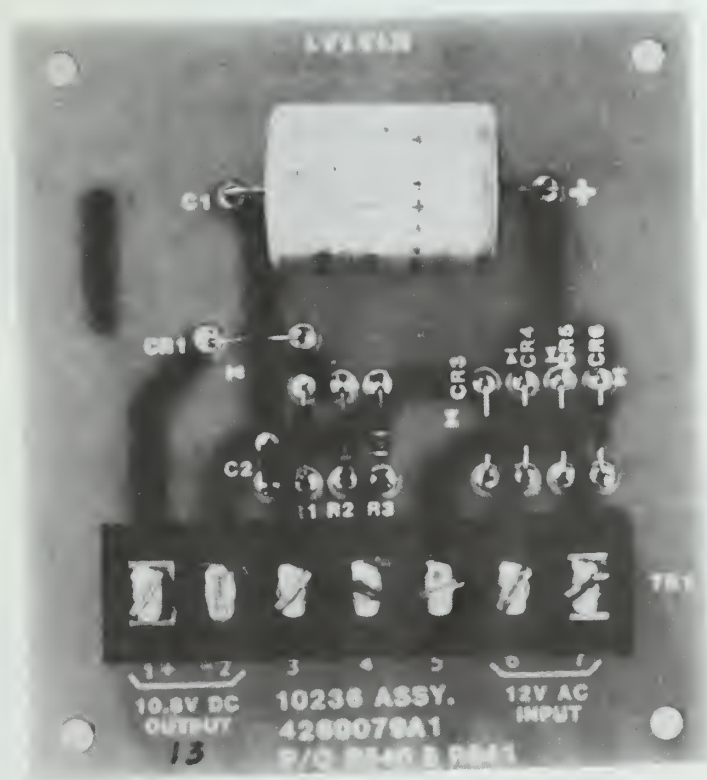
Battery Charger CCA N1A1A1 — Component and Wiring Sides
